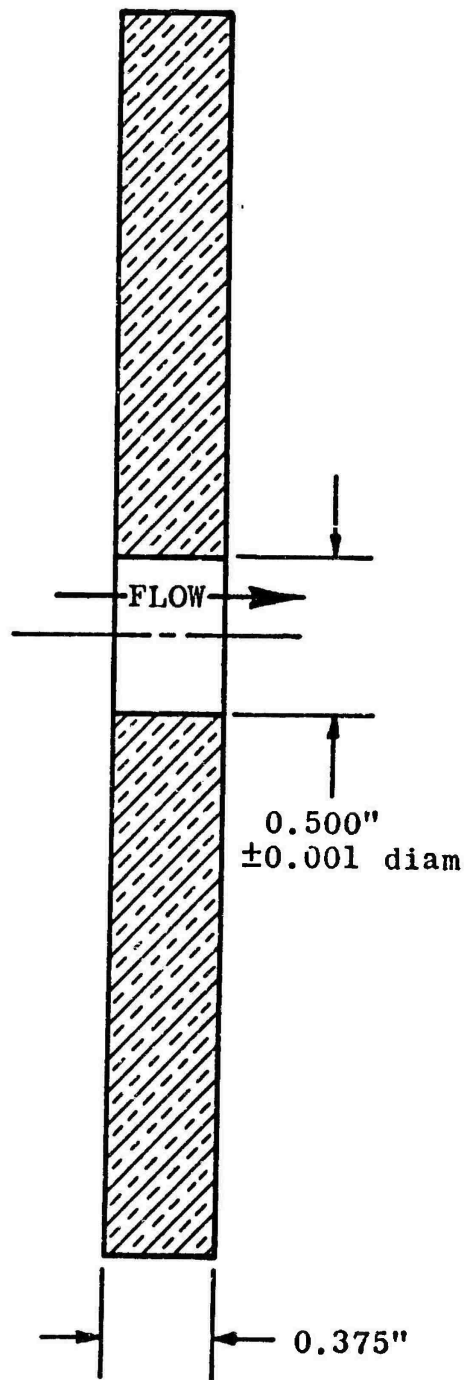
0.500 INCH DIAMETER SHARP EDGE NOZZLE.
